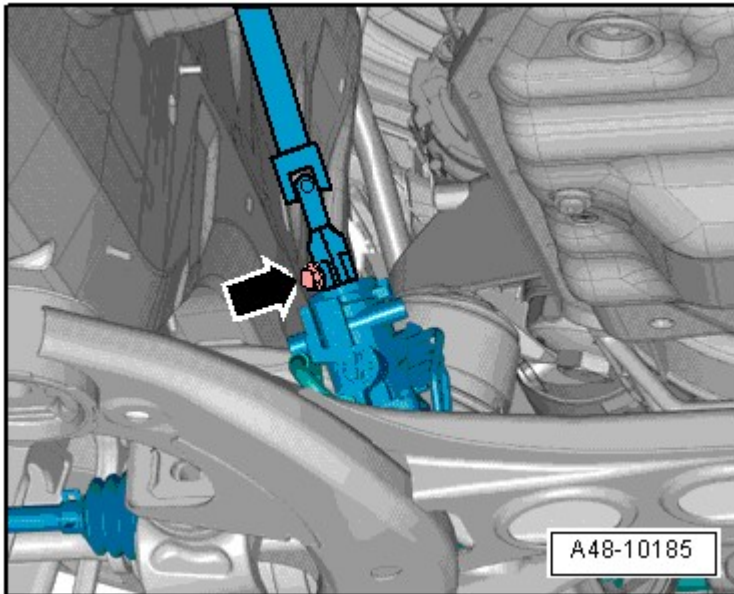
Identifying Universal Joint Bolt -Arrow-
